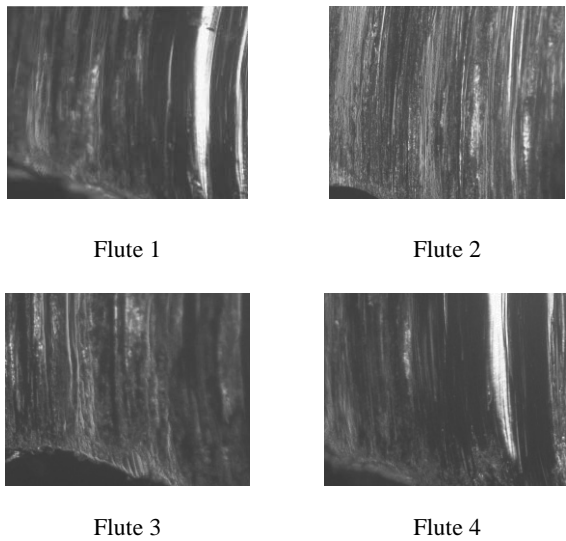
Flank wear under dry cutting for 10 minute at cutting speed of 20 m/min
